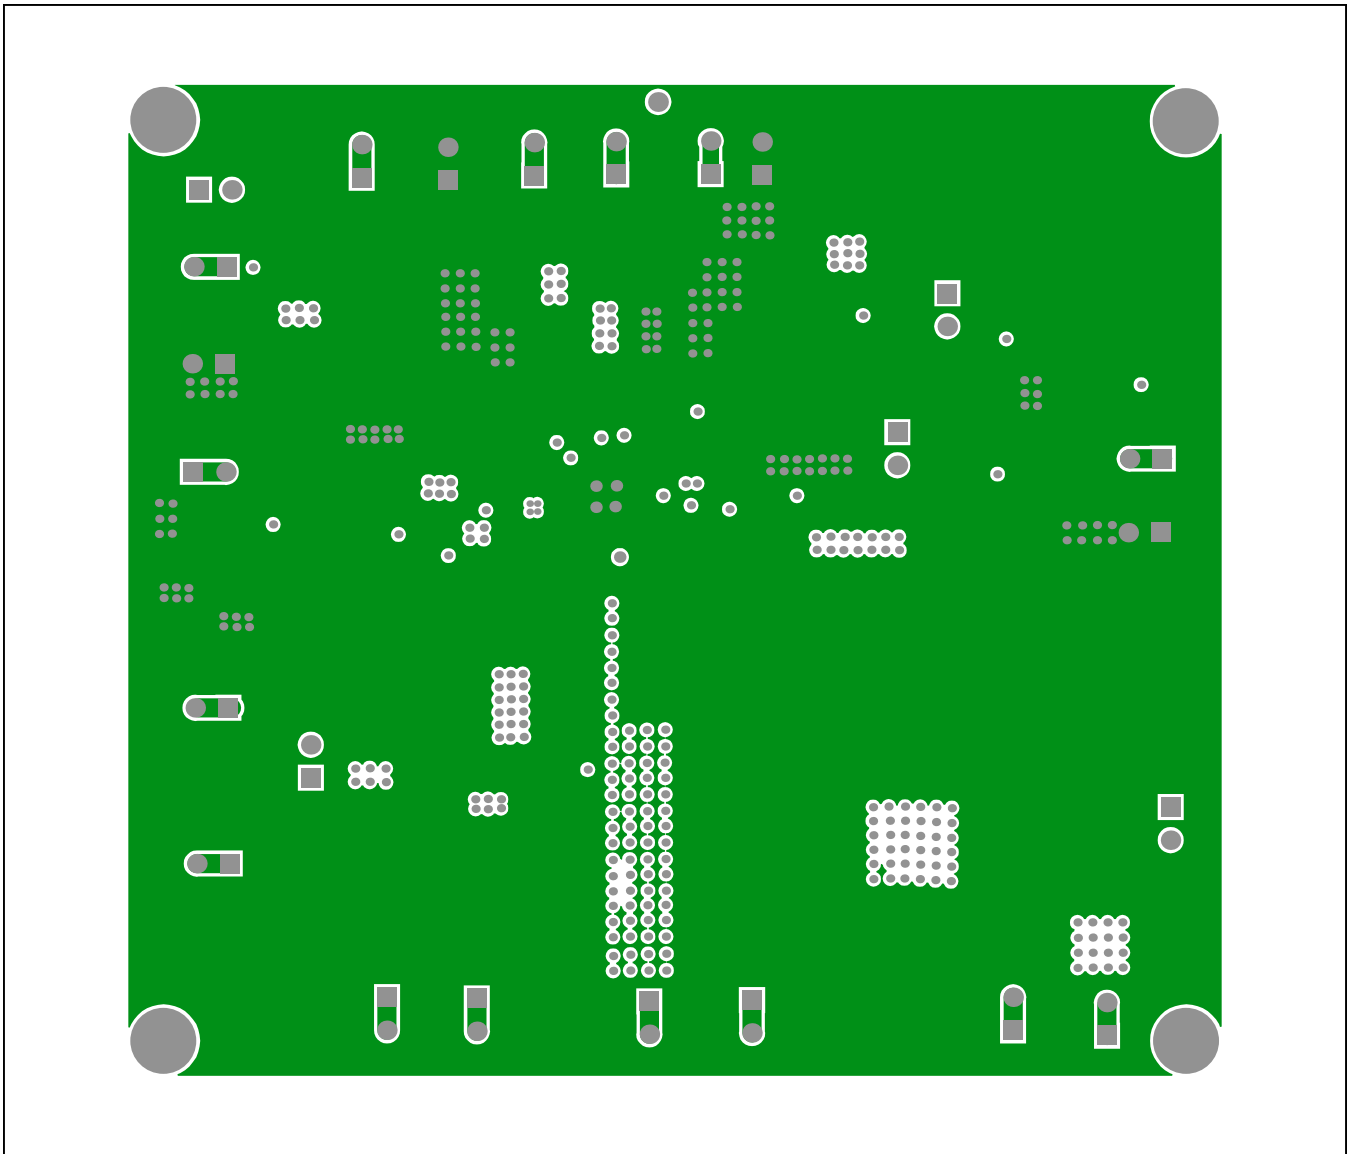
MAX20070 EV Kit PCB Layout—PGND Layer 2
